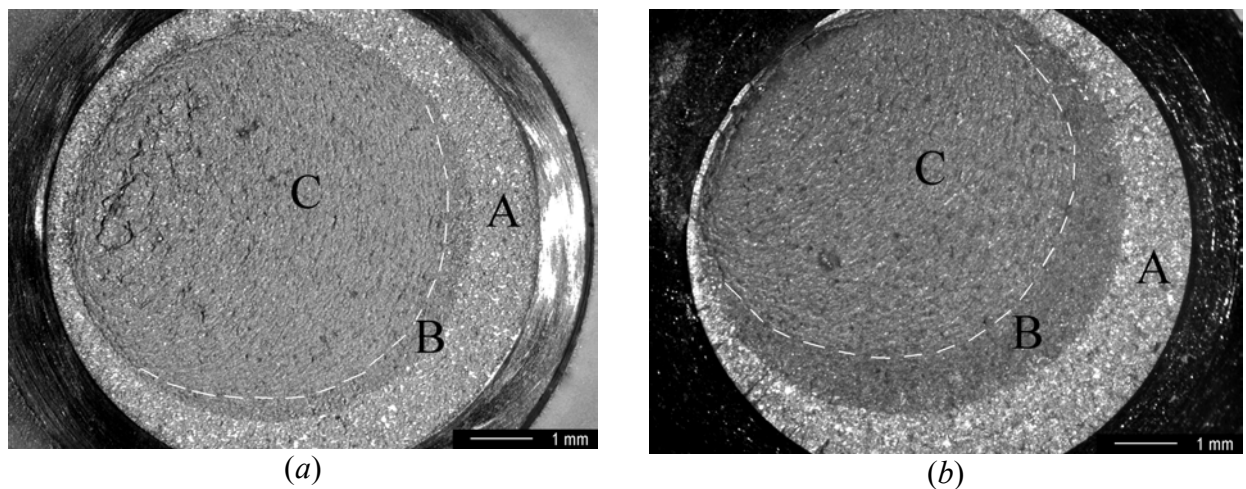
Fracture surface of a slow strain rate failure samples: (a) – unplated material; (b) – plated material. A – fatigue precrack; B – slow-crack propagation area; C – overload failure.
